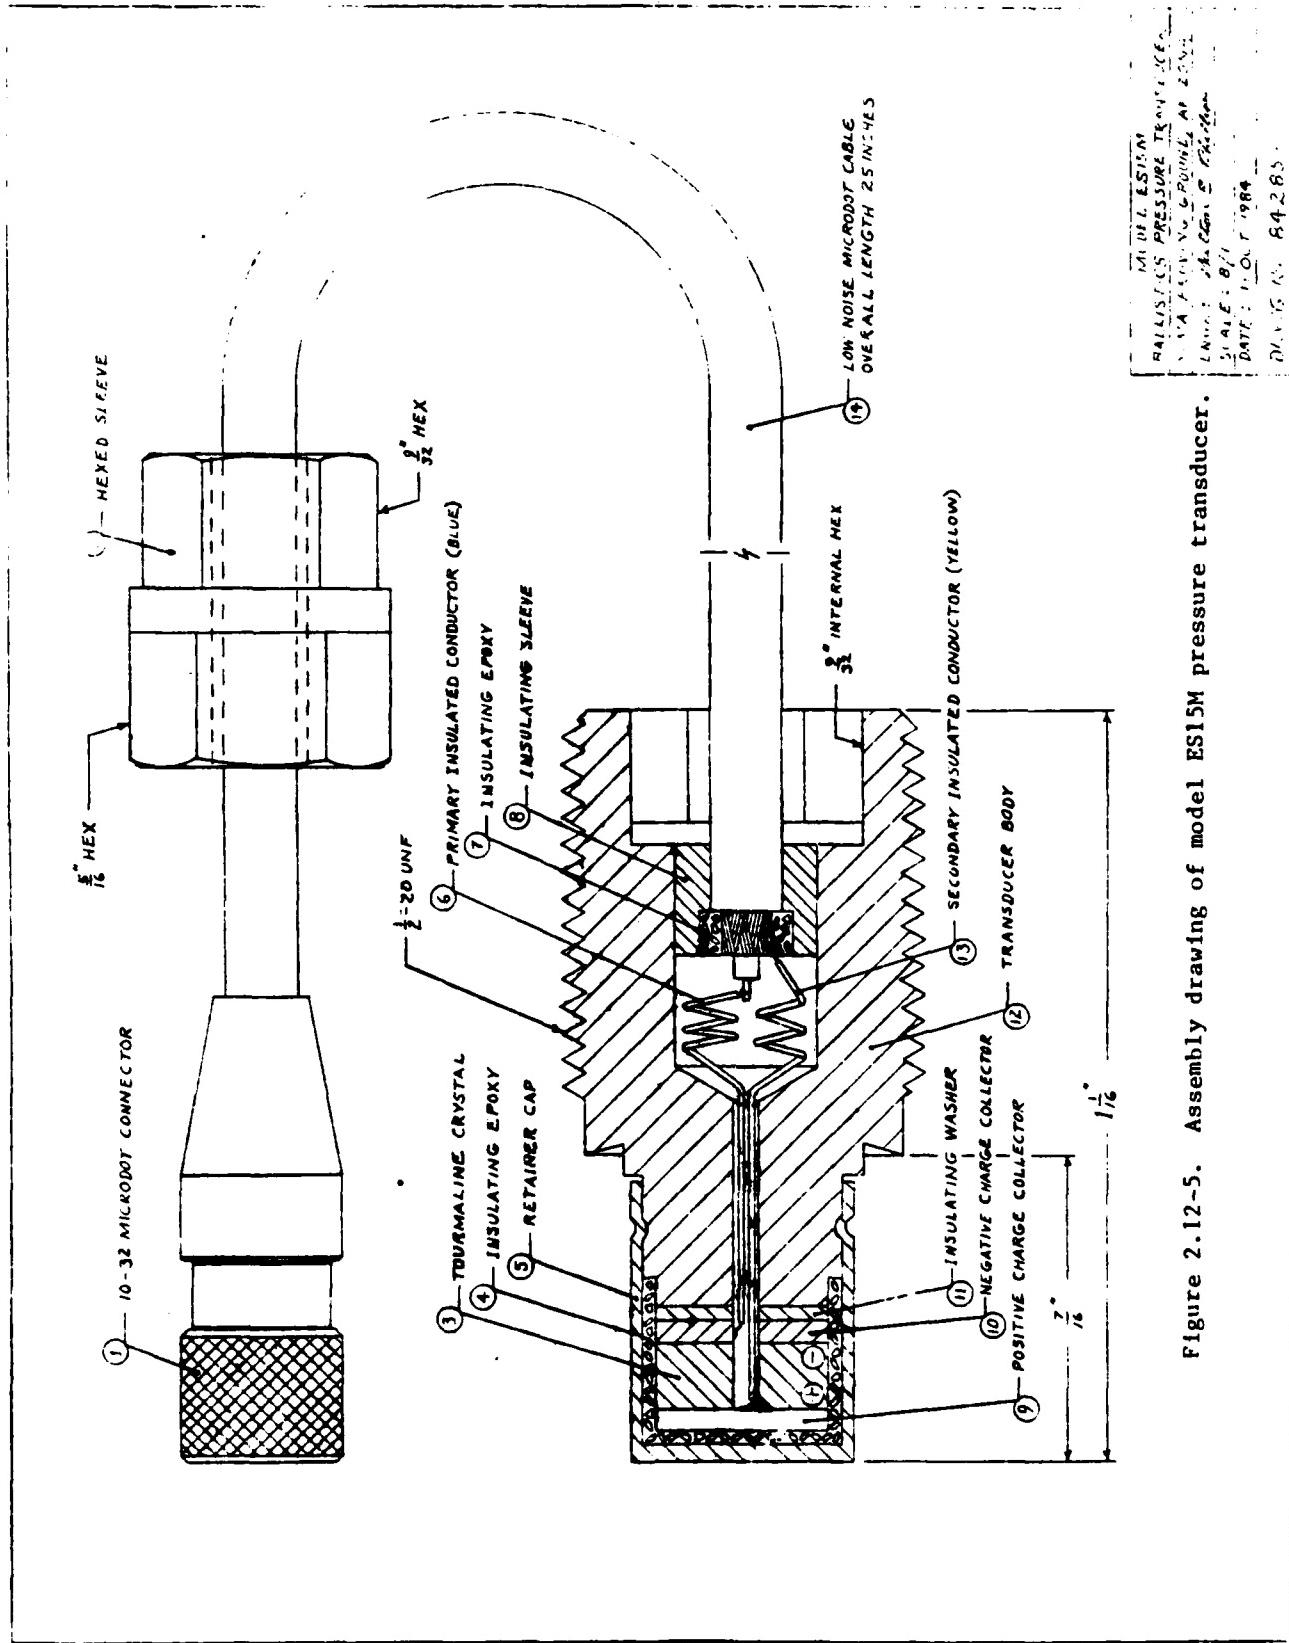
Assembly drawing of model ES15M pressure transducer.
